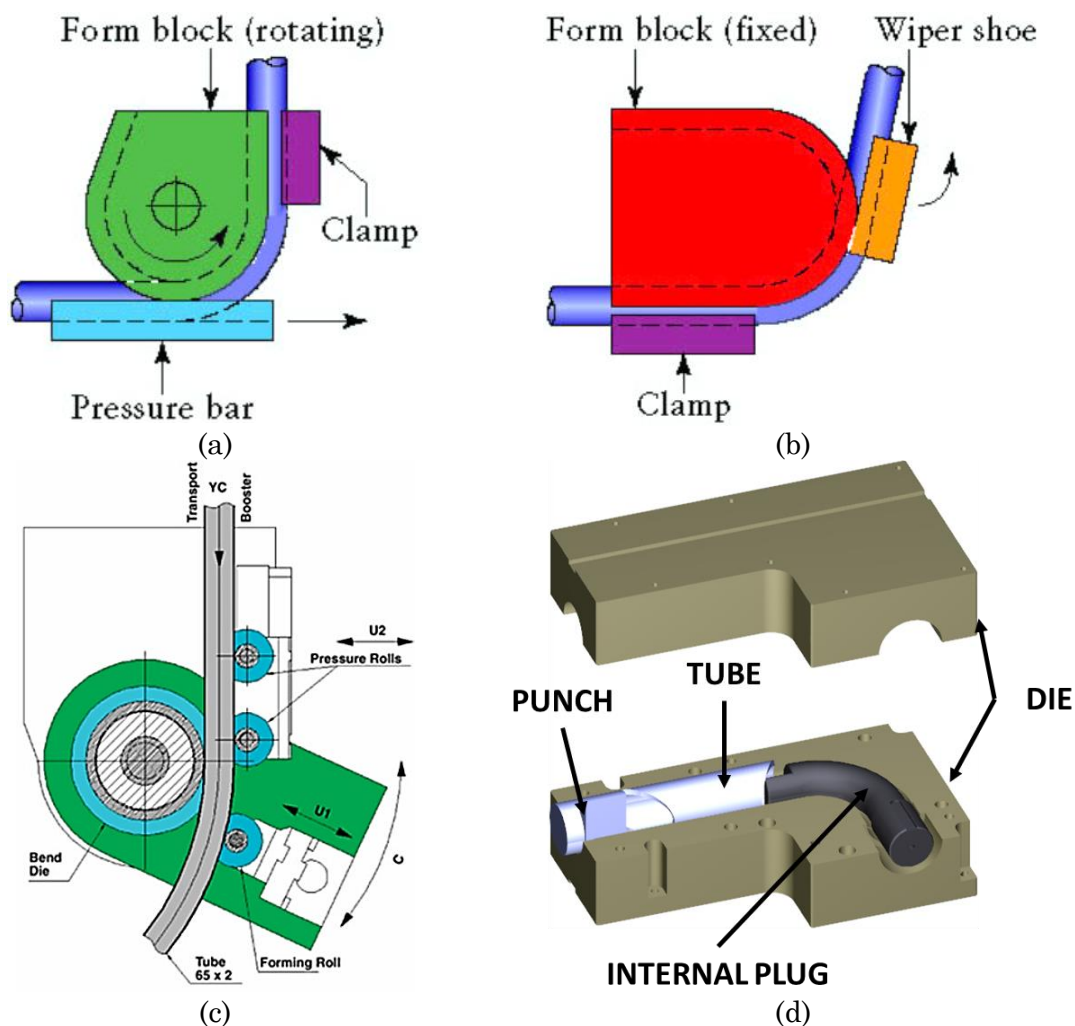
5: schemes of the described tube bending processes: rotary draw (a), compression (b), roll (c) and push (d) bending.
